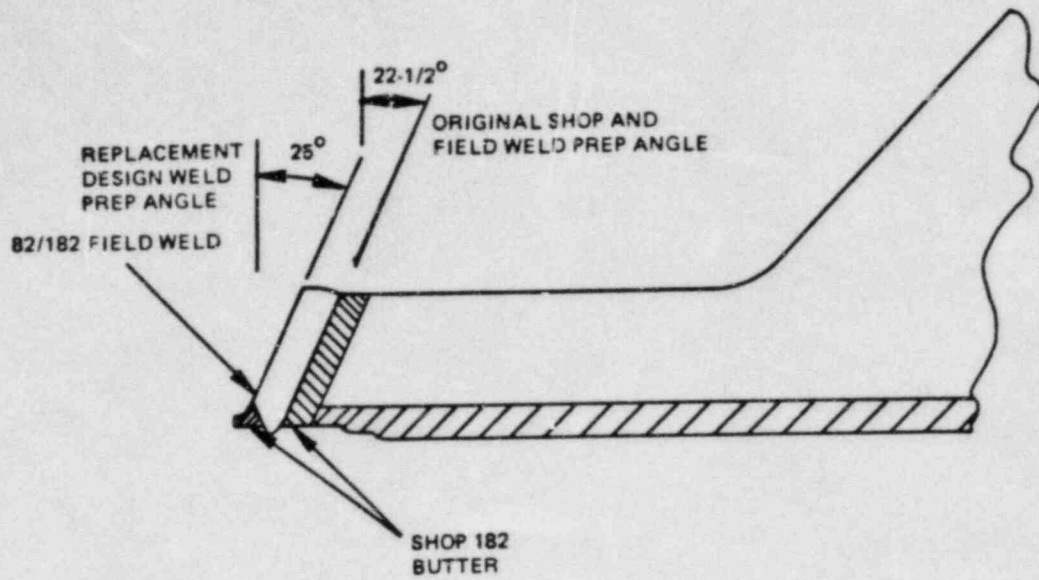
Configuration for Nozzles Where Field Weld and Original Safe-End Weld are Acceptable to Retain Desired Butter Thickness
